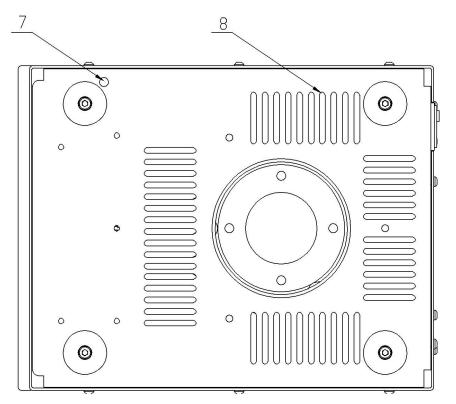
Picture of appearance of bottom side of CEN16-15 High-speed Benchtop Airrefrigerate Centrifuge
